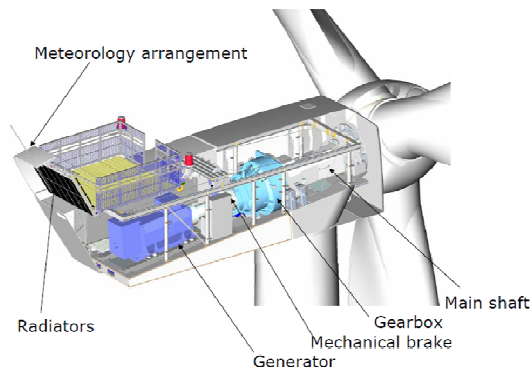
Ghost view of wind turbine nacelle, showing typical arrangement of turbine machinery including generator and gearbox. (Vestas (2004))
